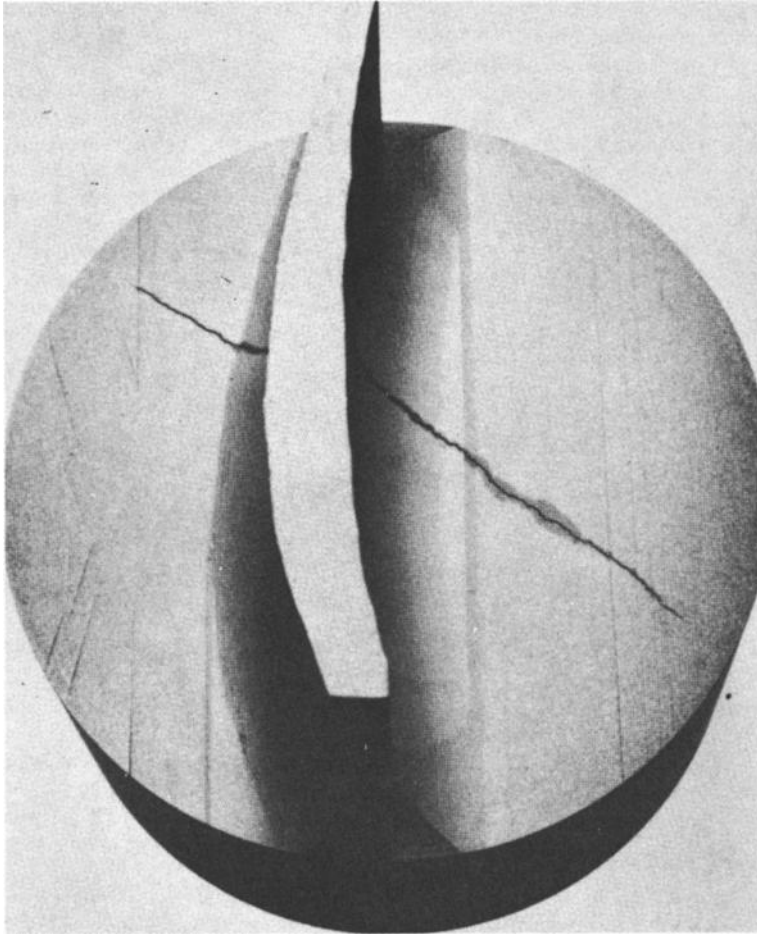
High-speed steel punch that cracked on heat treatment because of the large difference in section size
